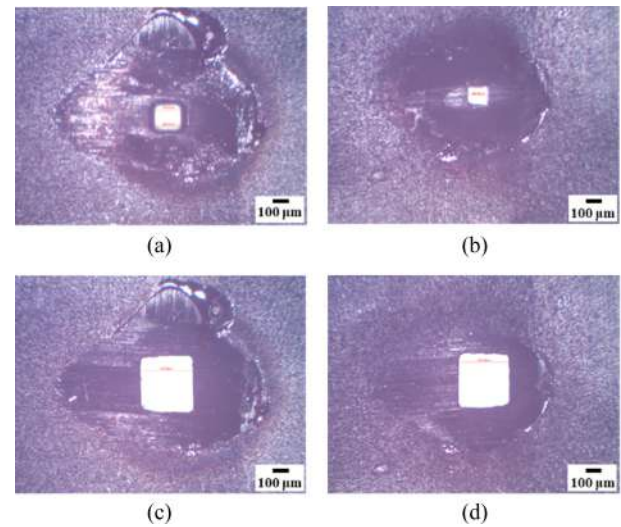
Square shape machining on CFRP using hybrid machining for feasibility test: after laser pre-processing (a) Front view, (b) Backside view; after EDM post-processing (c) Front view, and (d) Backside view
